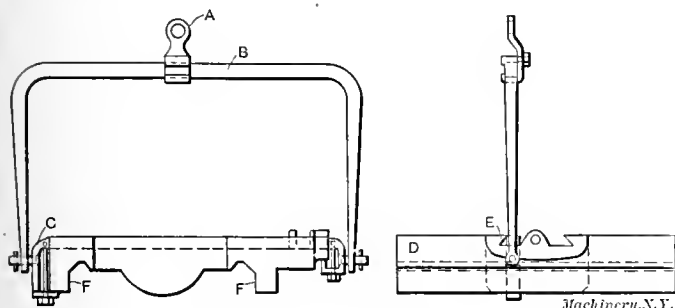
Sling for Lifting Lathe Carriages, which is equipped with an Adjustable Crane-hook Eye.
